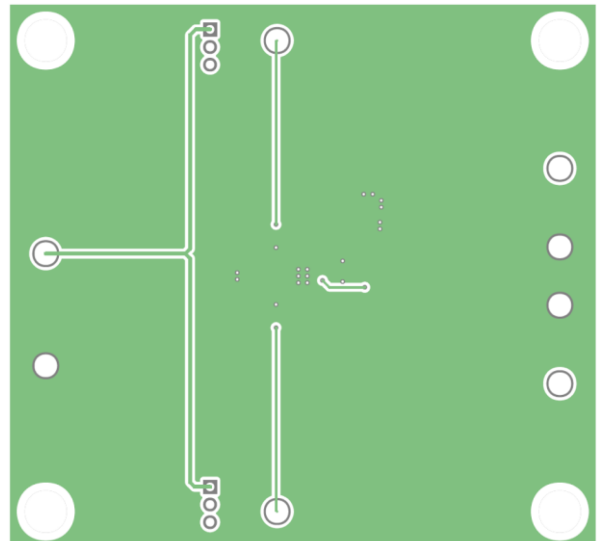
EVAL-ADPL31613-AZ PCB Layout—Layer 3
